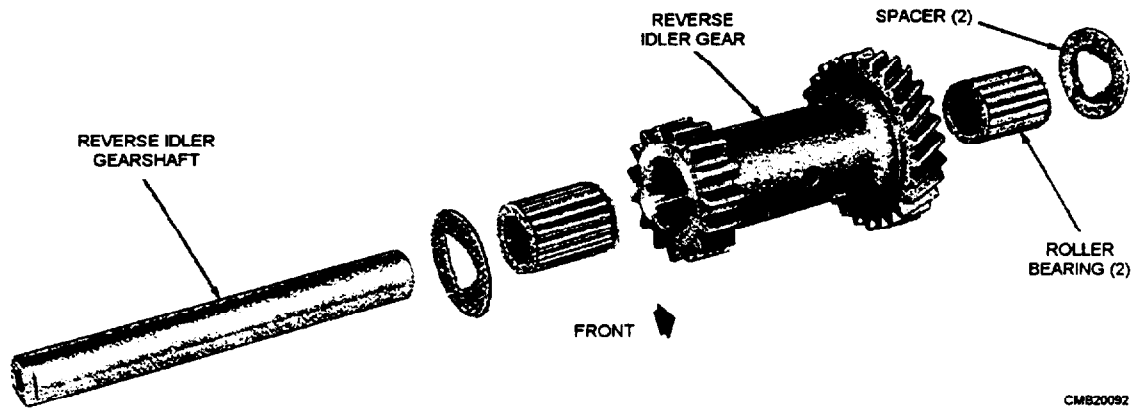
Reverse idler shaft and gear assembly-exploded view.
